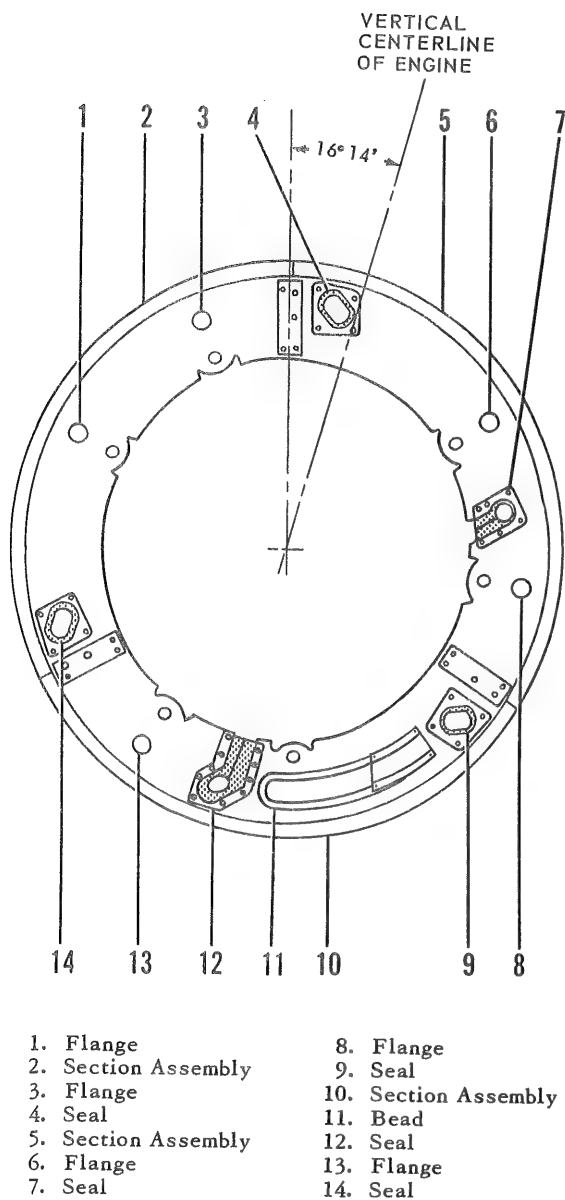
Fire Seal and Cut-Outs (Typical)
